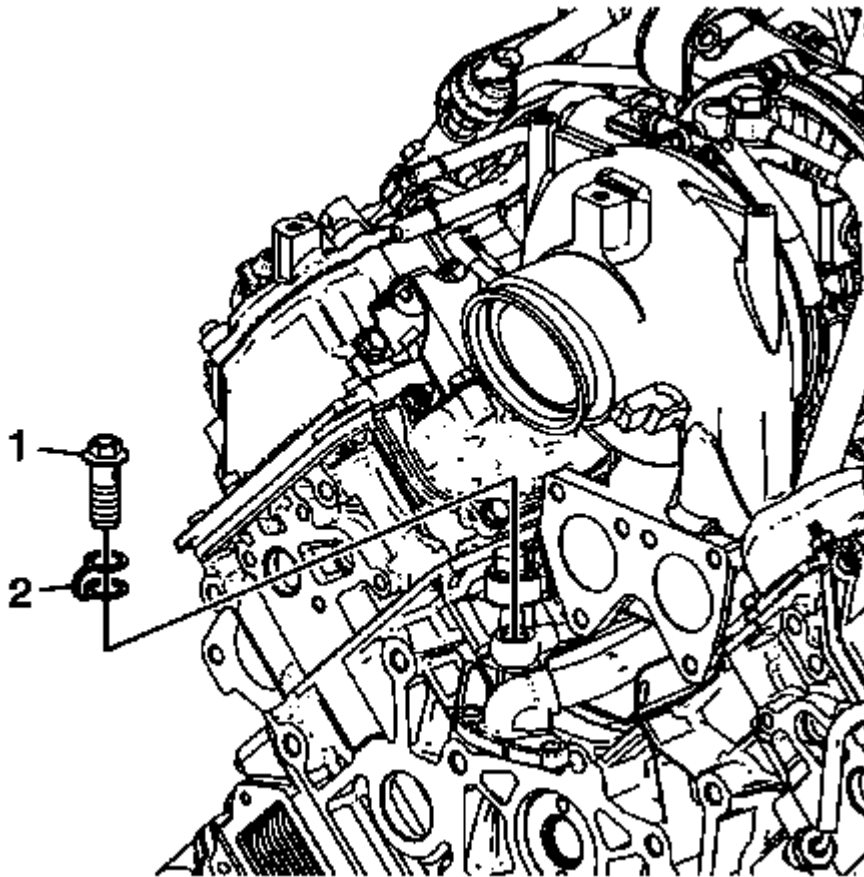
View Of Turbocharger Oil Feed Pipe Eye Bolt & Washers
